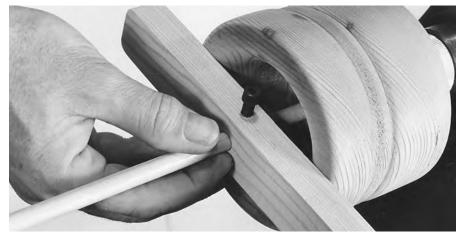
You can make a simple gauge to check the depth of cut on hollowing jobs.
